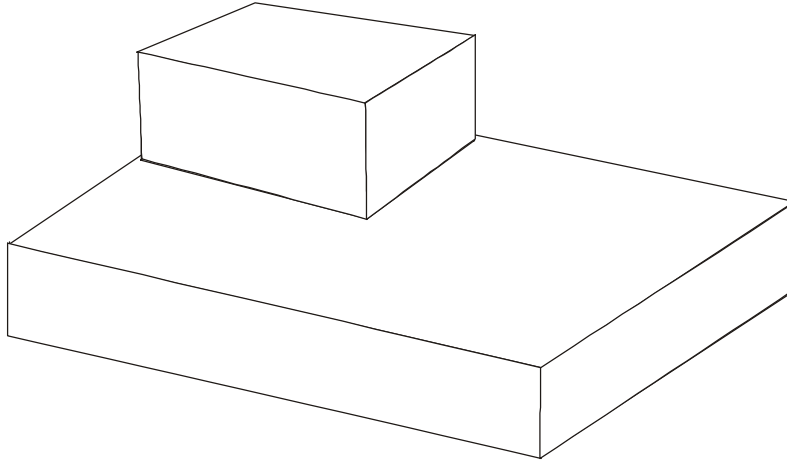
Transferring measurements from the orthographic view to the isometric drawing.
